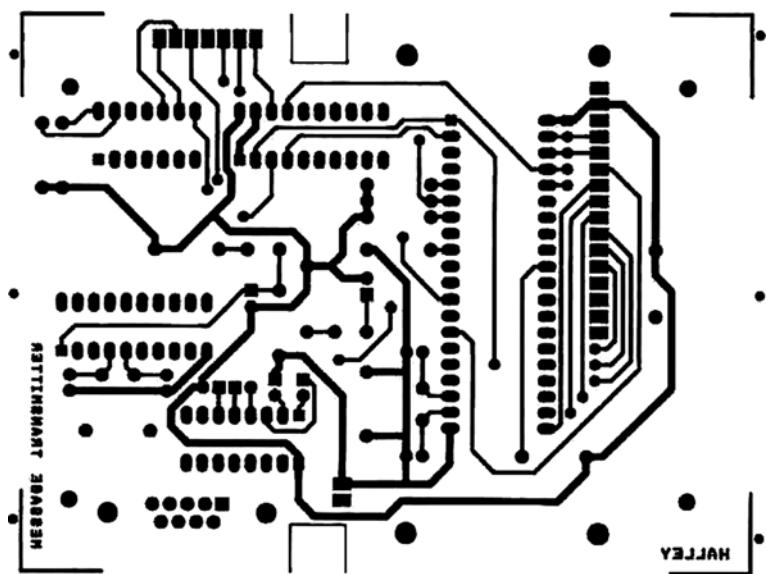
PCB (*bottom layer*) layout of wireless message device for mines
